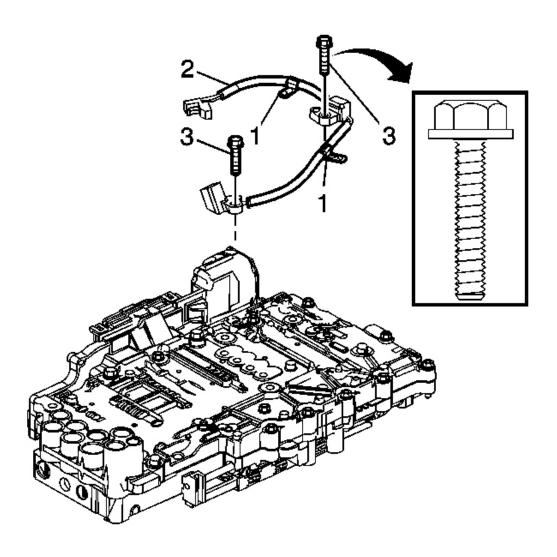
View Of Control Solenoid Valve Assembly Courtesy of GENERAL MOTORS CORP.
